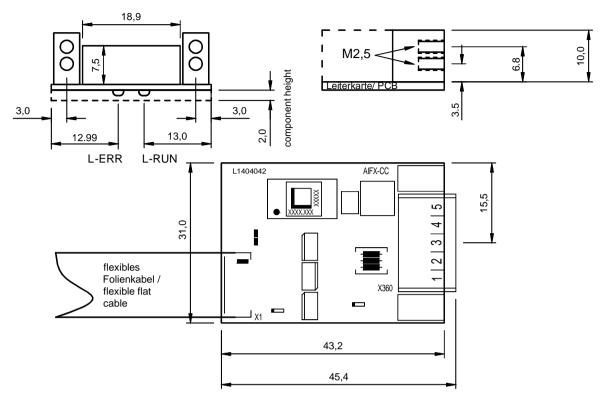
Dimensioning CC-Link Assembly Interface (AIFX-CC)
